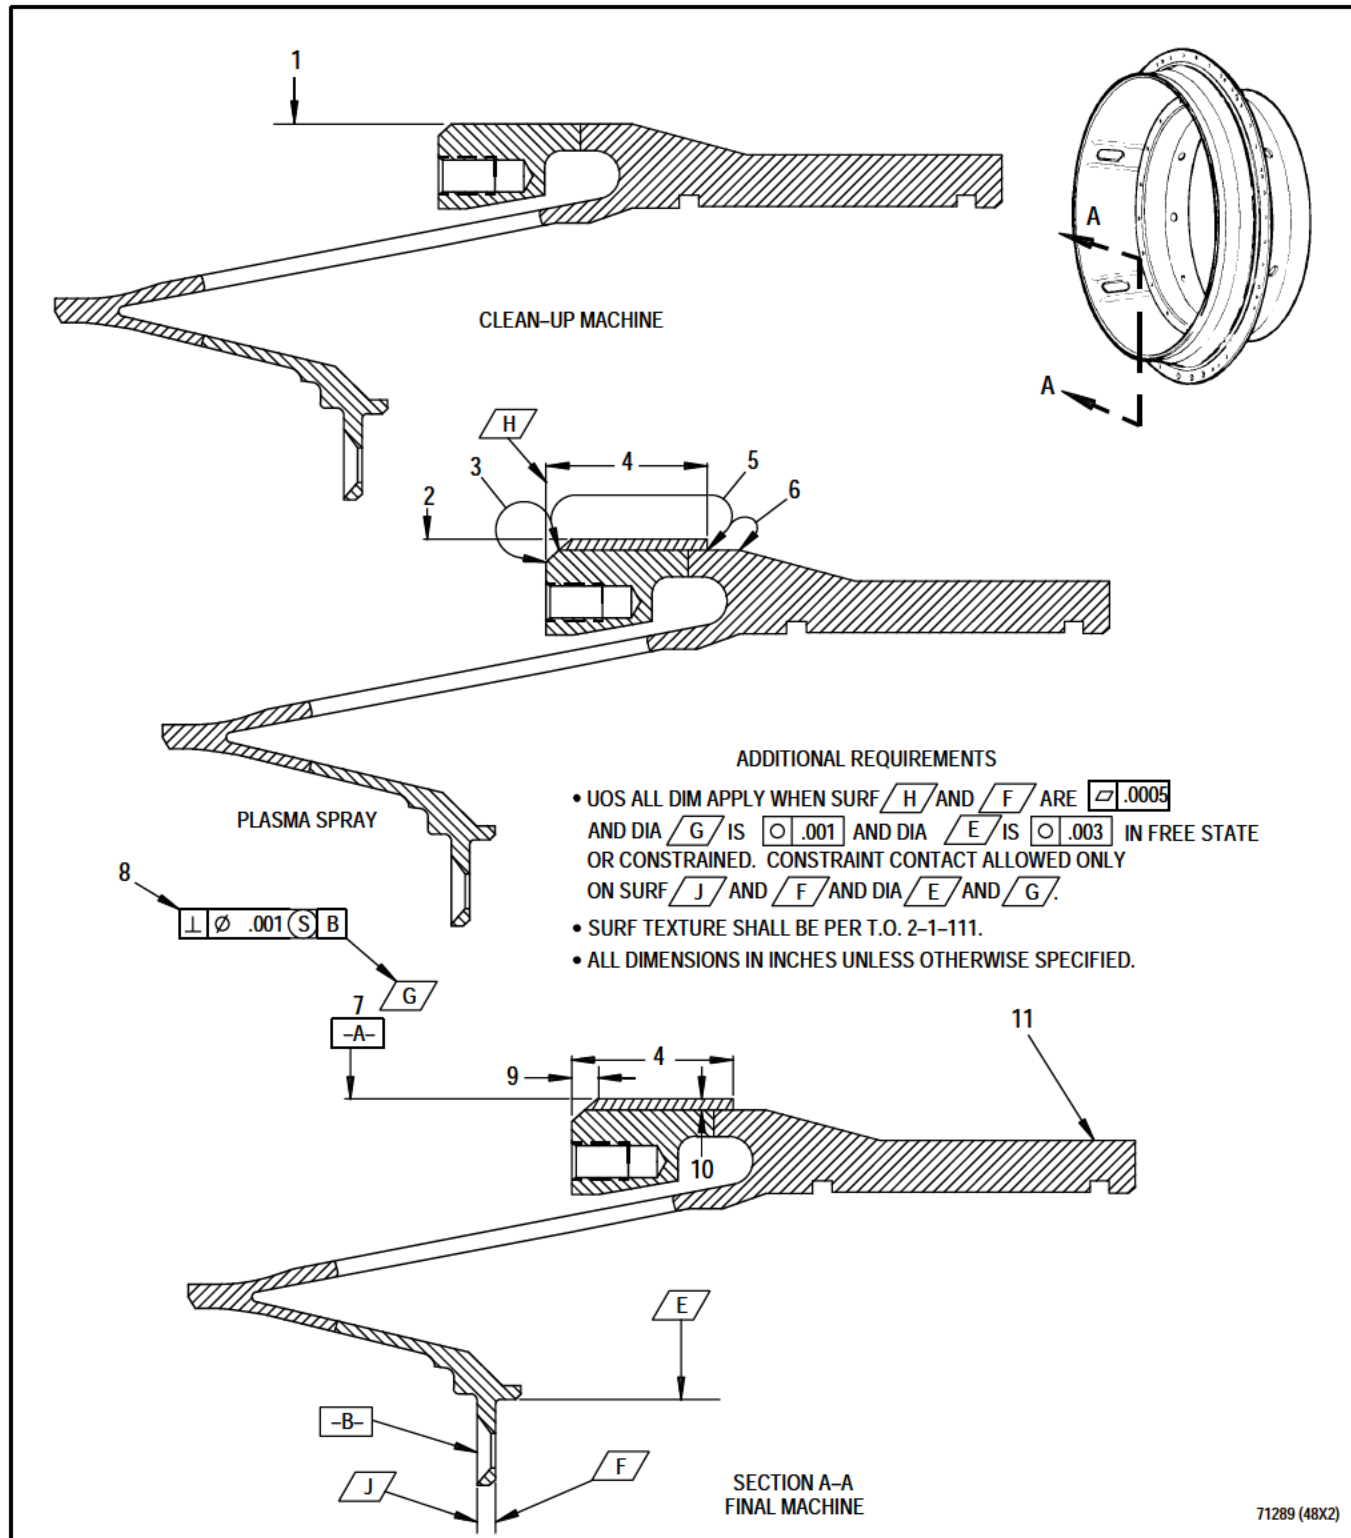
No. 3 Bearing Support Assembly - Bearing Journal Repair
